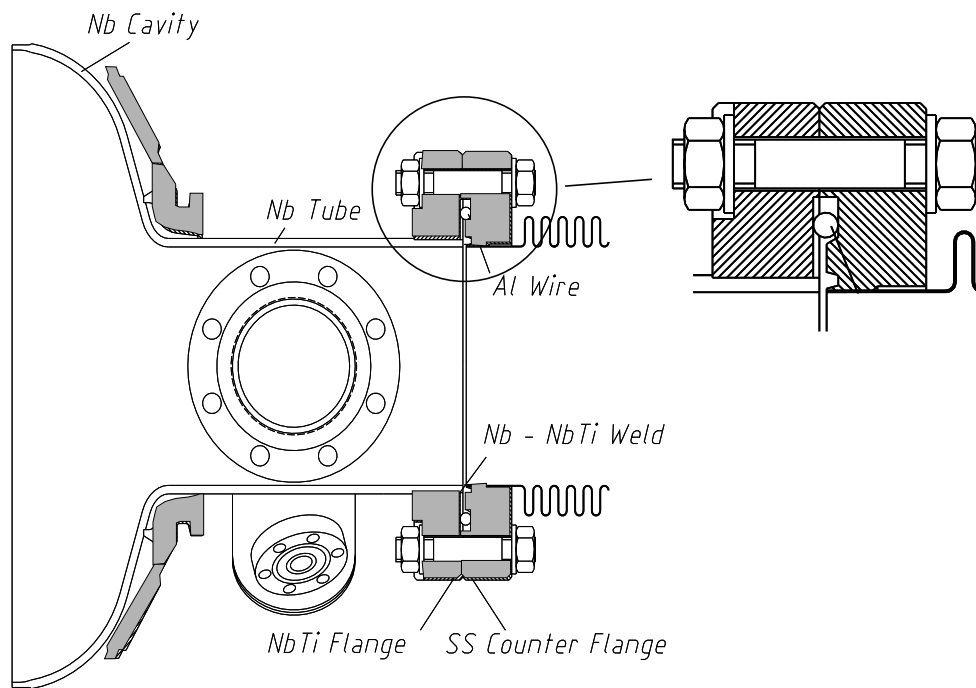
New flange design of the niobium cavities for TESLA/TTF with enlarged view of the sealing area.
